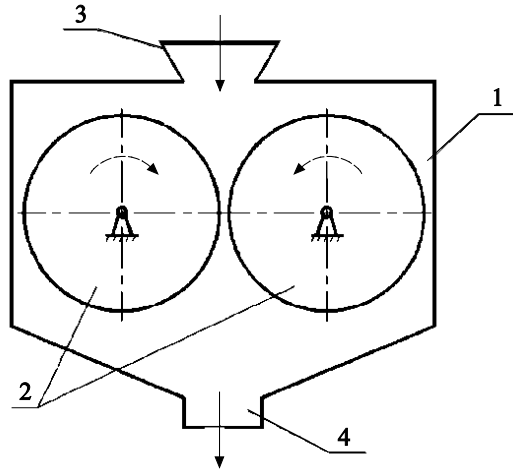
Rolling processing unit with smooth roller surfaces [23]
